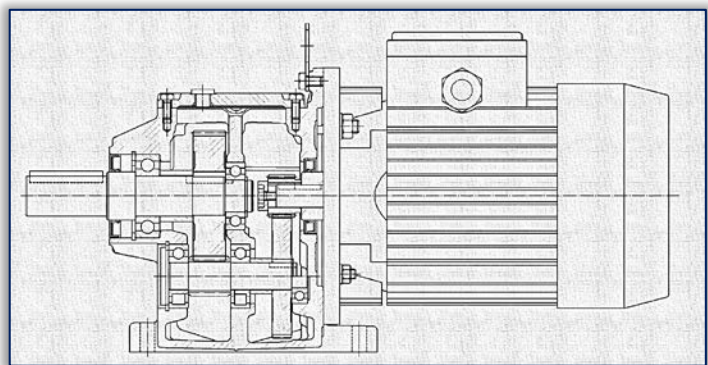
Characteristic solution of a two-stage universal motor gearbox with a fifth gear shaft, at higher torques (and higher axle heights), mounted with single-row cylindrical roller bearings (ROSSI [1])
